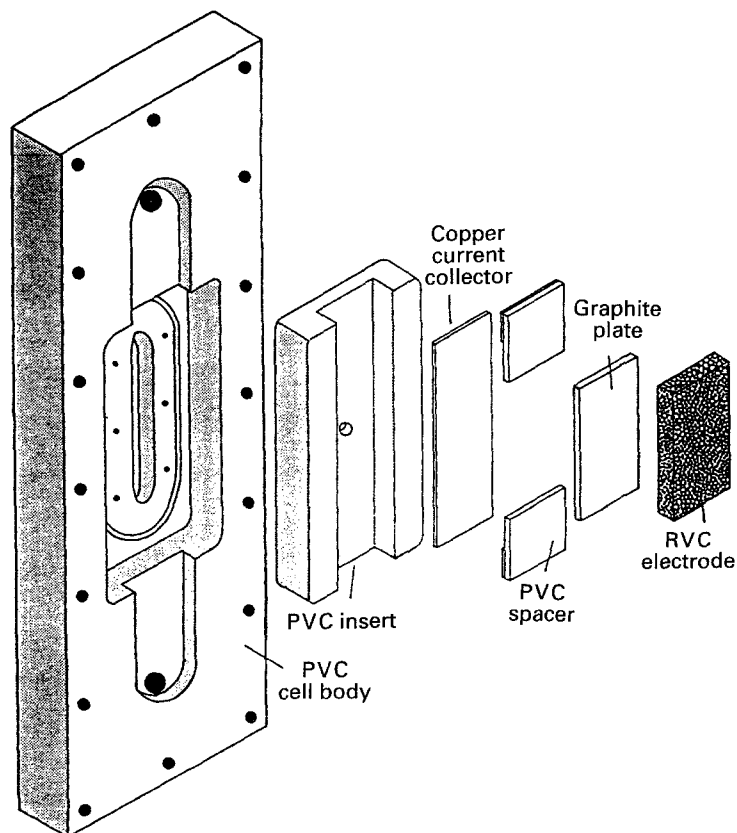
Exploded view of cell half showing the electrode and electrode holder.
